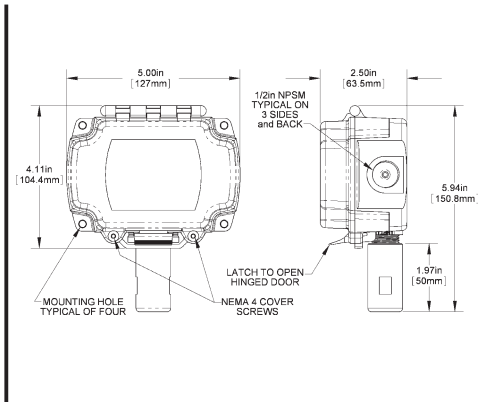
BB, 1" Buffer w/plastic Threaded Fitting
